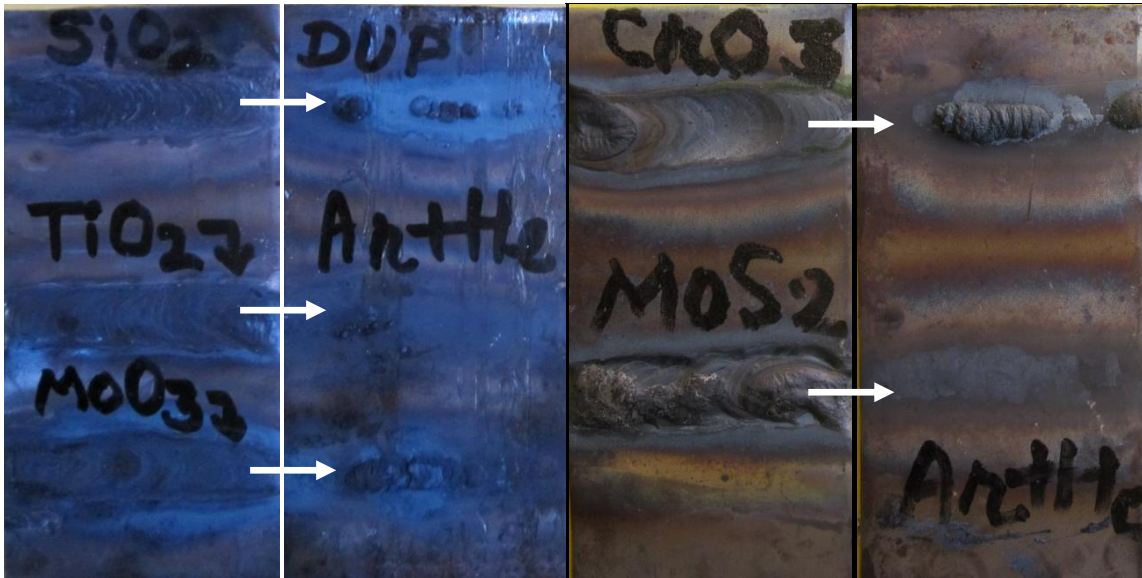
Weld bead appearance (top, bottom surface) of A-TIG with five different fluxes for DUPLEX 2205 workpiece (125 A, Ar 70% + He 30%, flow rate 10 L/min)
